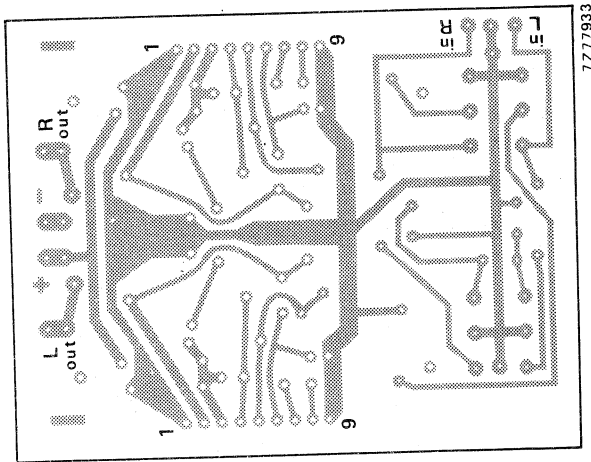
Track side of printed-circuit board used for the circuit of Fig. 12; p.c. board dimensions 83 mm x 65 mm.
